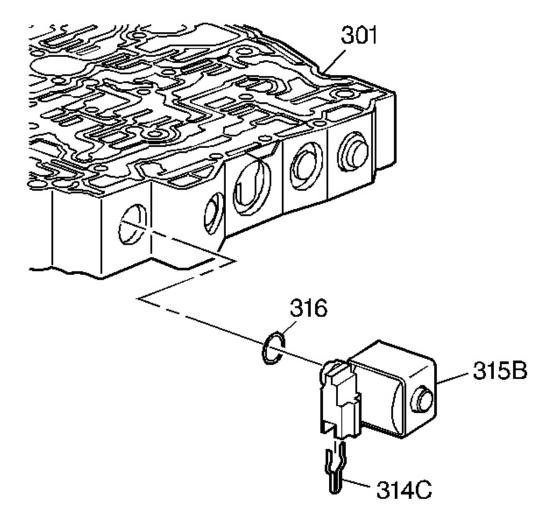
View Of 2-3 Shift Solenoid & O-Ring Courtesy of GENERAL MOTORS CORP.
